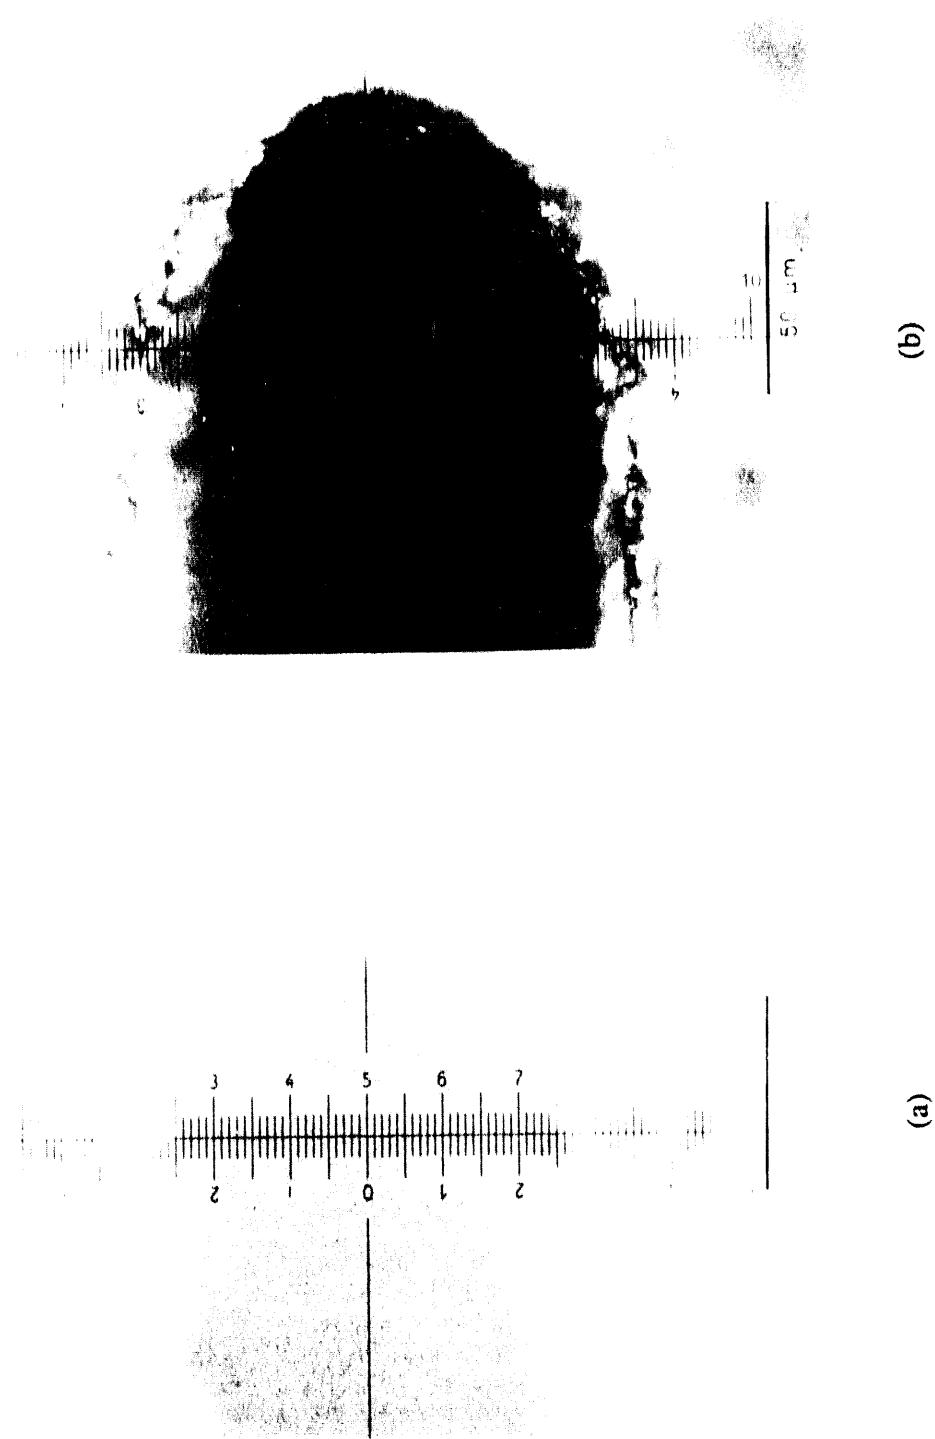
EDM notch tip geometry appearance in (a) CS-19 aluminum specimen and (b) A533B steel specimen.
